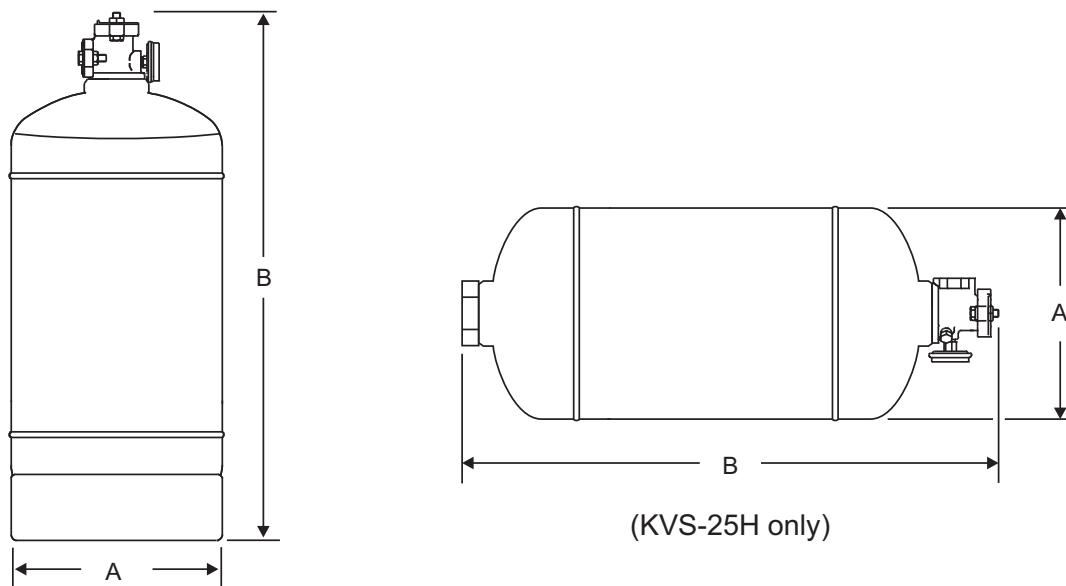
KVS Dry Chemical Cylinder and Valve Assembly
